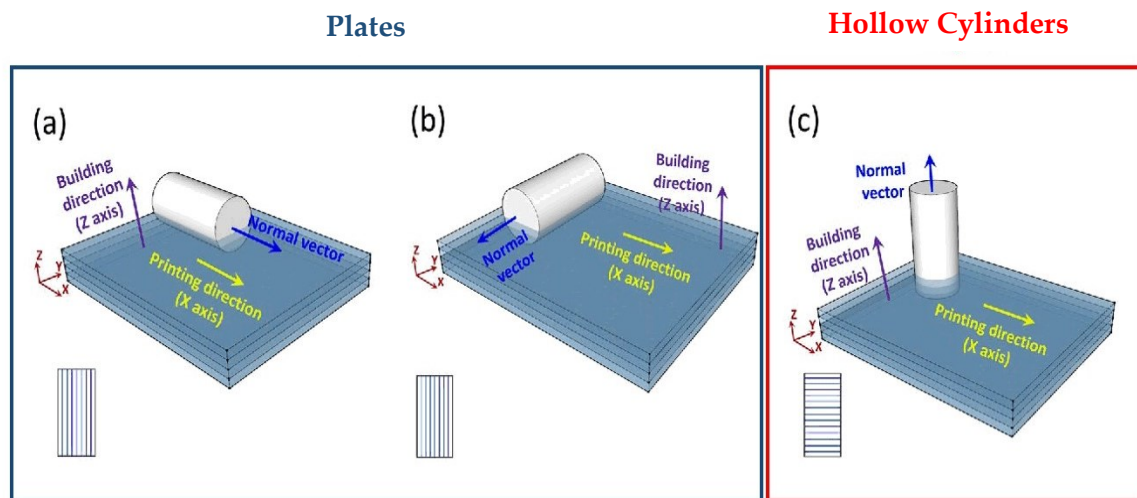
Building direction on the example of a cylinder – the plates were manufactured laying like in (a) and (b) and the hollow cylinders standing like (c)
